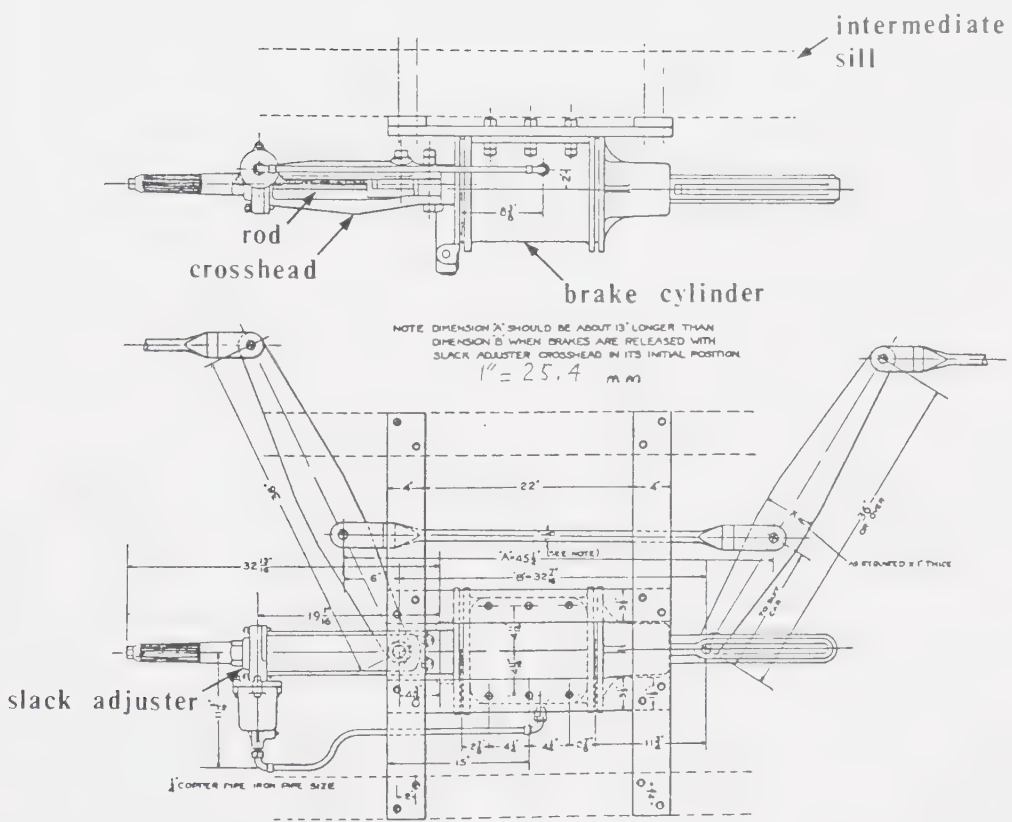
SIDE & PLAN VIEWS OF A WESTINGHOUSE FORM "J" SLACK ADJUSTER
